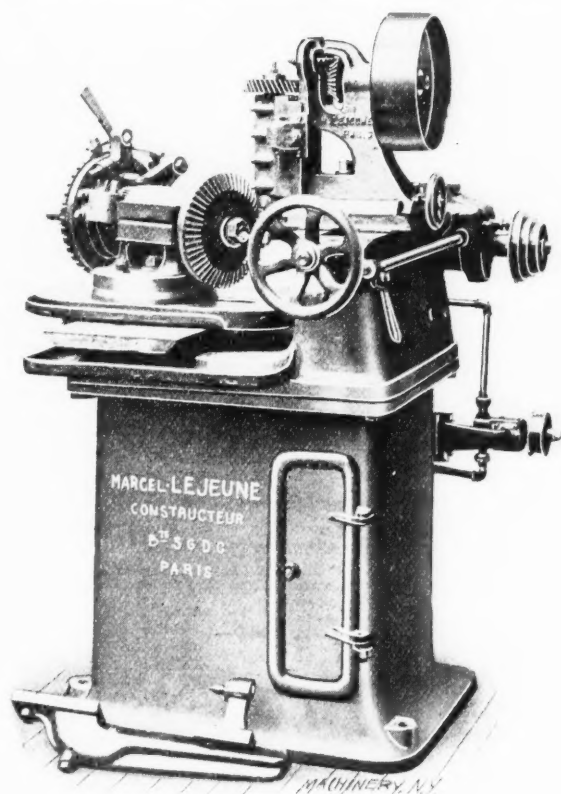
A Special Milling Machine for Cutting Bevel Gear Teeth.
